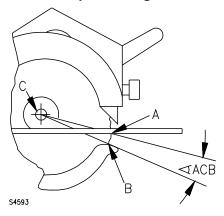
Accessibility to the front cutting edge zone JILNORM. CHICK to VIEW su0929
